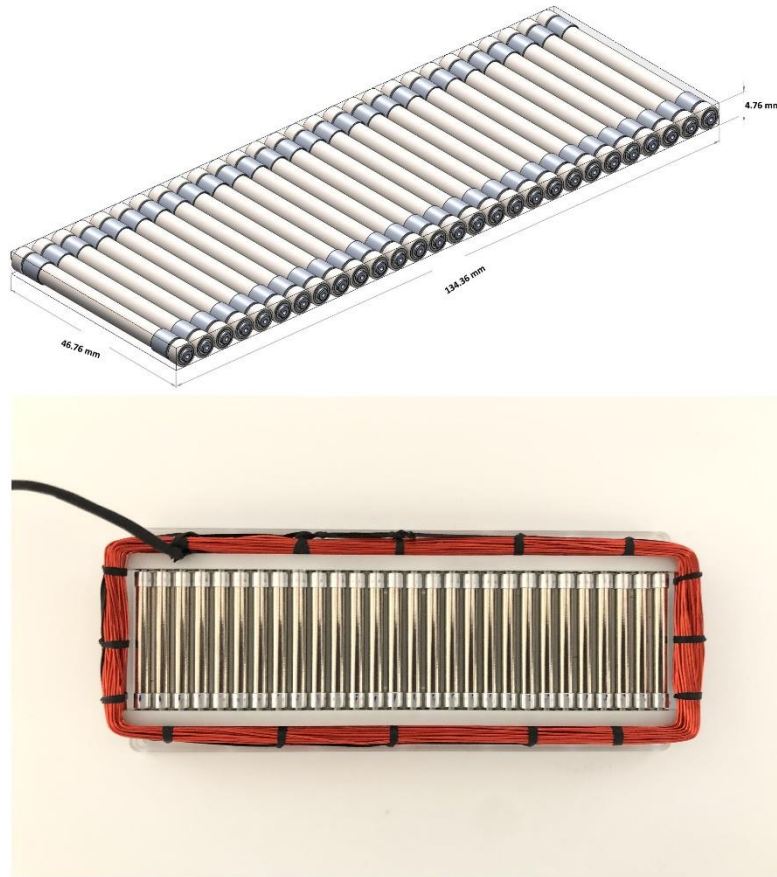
Magnetic pendulum array CAD model and prototype assembly.
